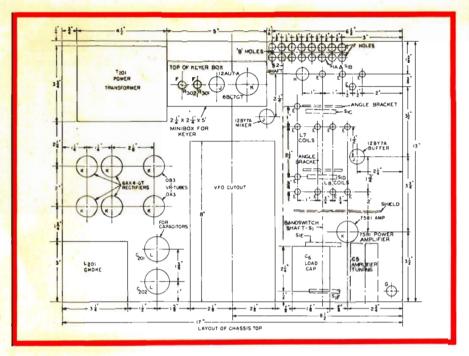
CHASSIS DRILLING DIAGRAM for the hetrodyne exciter. Hole locations and sizes are those for the parts used in W2FBS's model. All parts should be carefully checked to determine hole sizes and locations actually required before drilling the chassis. Approximate locations for the angle brackets for the bandswitch, and interstage shield are illustrated. Outlines showing the space allotted to the power transformer (T_{201}) , filter choke (L_{201}) and packaged VFO unit ore approximate and indicate the space needed for the largest such parts apt to be used in constructing this exciter unit.
